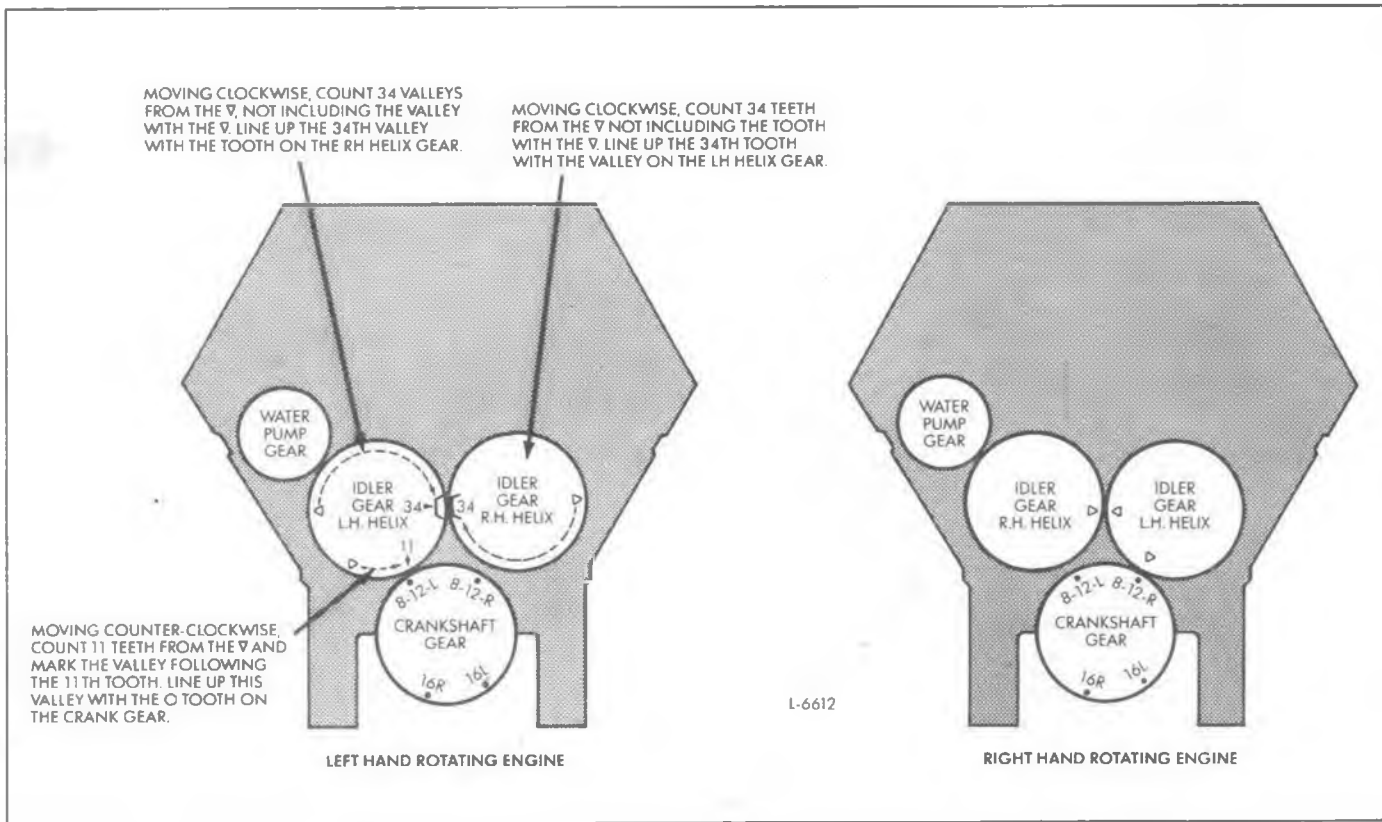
Front Gear Train Timing Marks - 8V-149 Engine
